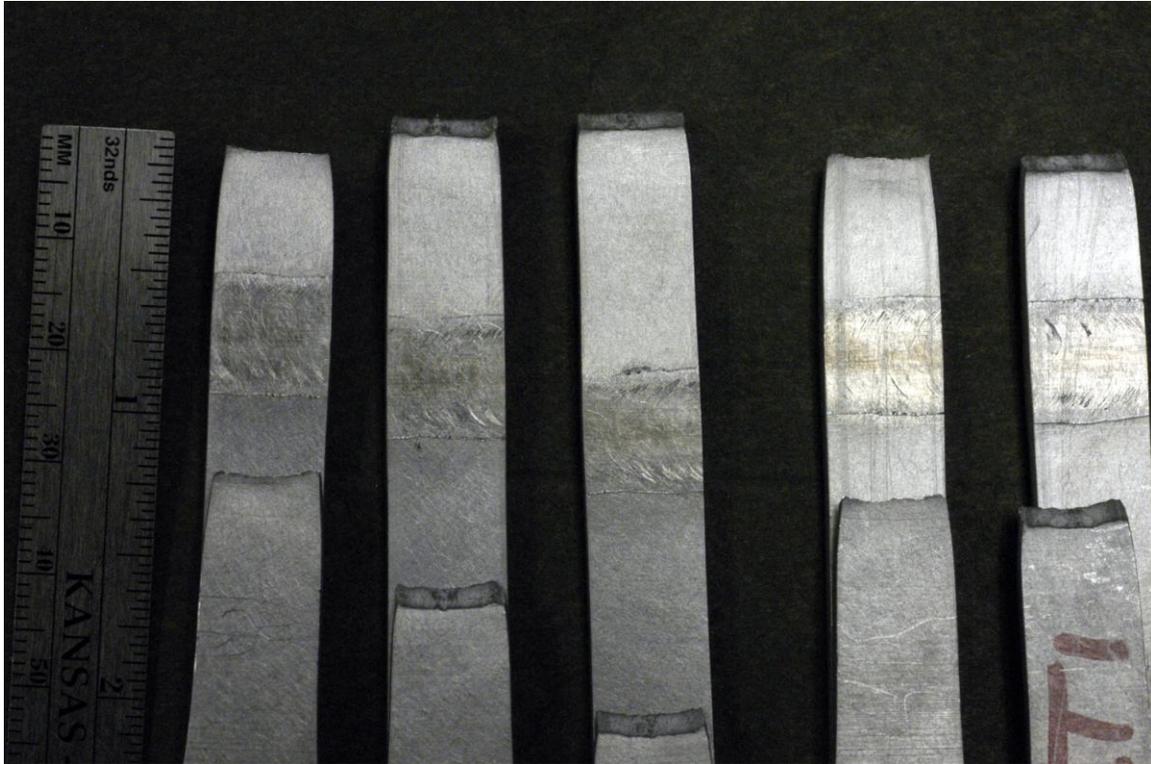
Parent metal failure during tension of Al 5456-H111 – 0.125 thick HRS-FSW welds.
